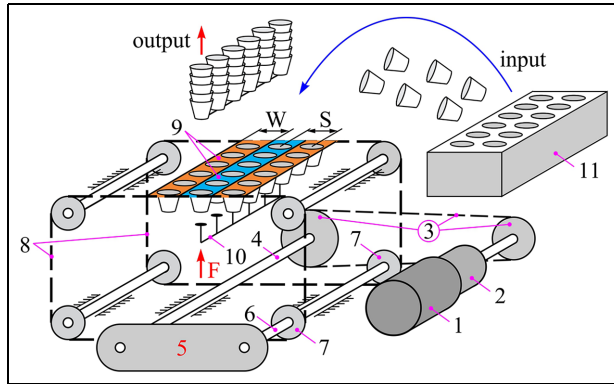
Schematic representation of a stacker for cup-like products: 1 – actuator, 2 – gearbox, 3 – chain drive, 4 – input/driving shaft, 5 – stacker mechanism that provides intermittent motion, 6 – output/driven shaft, 7 – conveyor driving sprockets, 8 – chains, 9 – panels, 10 – puncher and 11 – mould.
